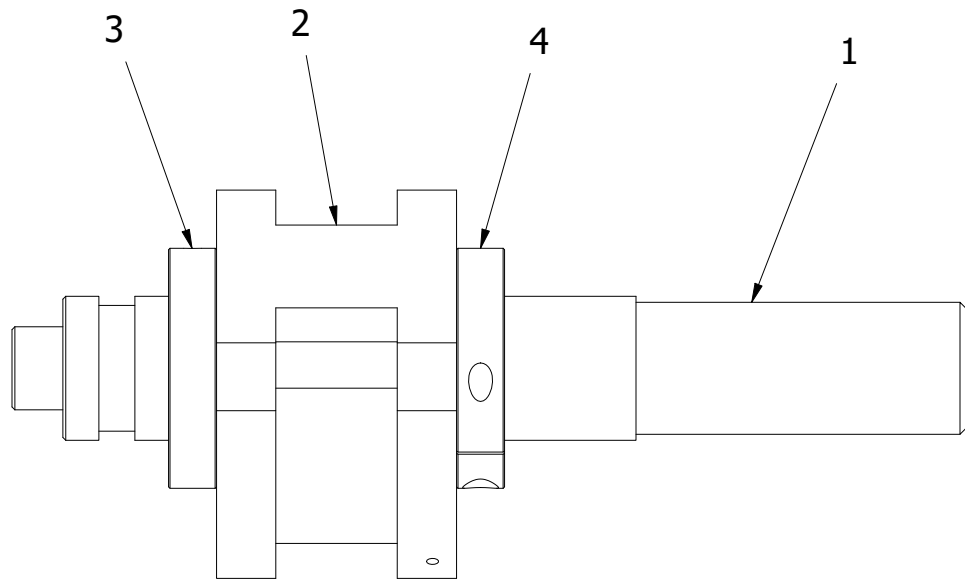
AM-1928-E10 Aft Mount Spindle Assembly, LH
